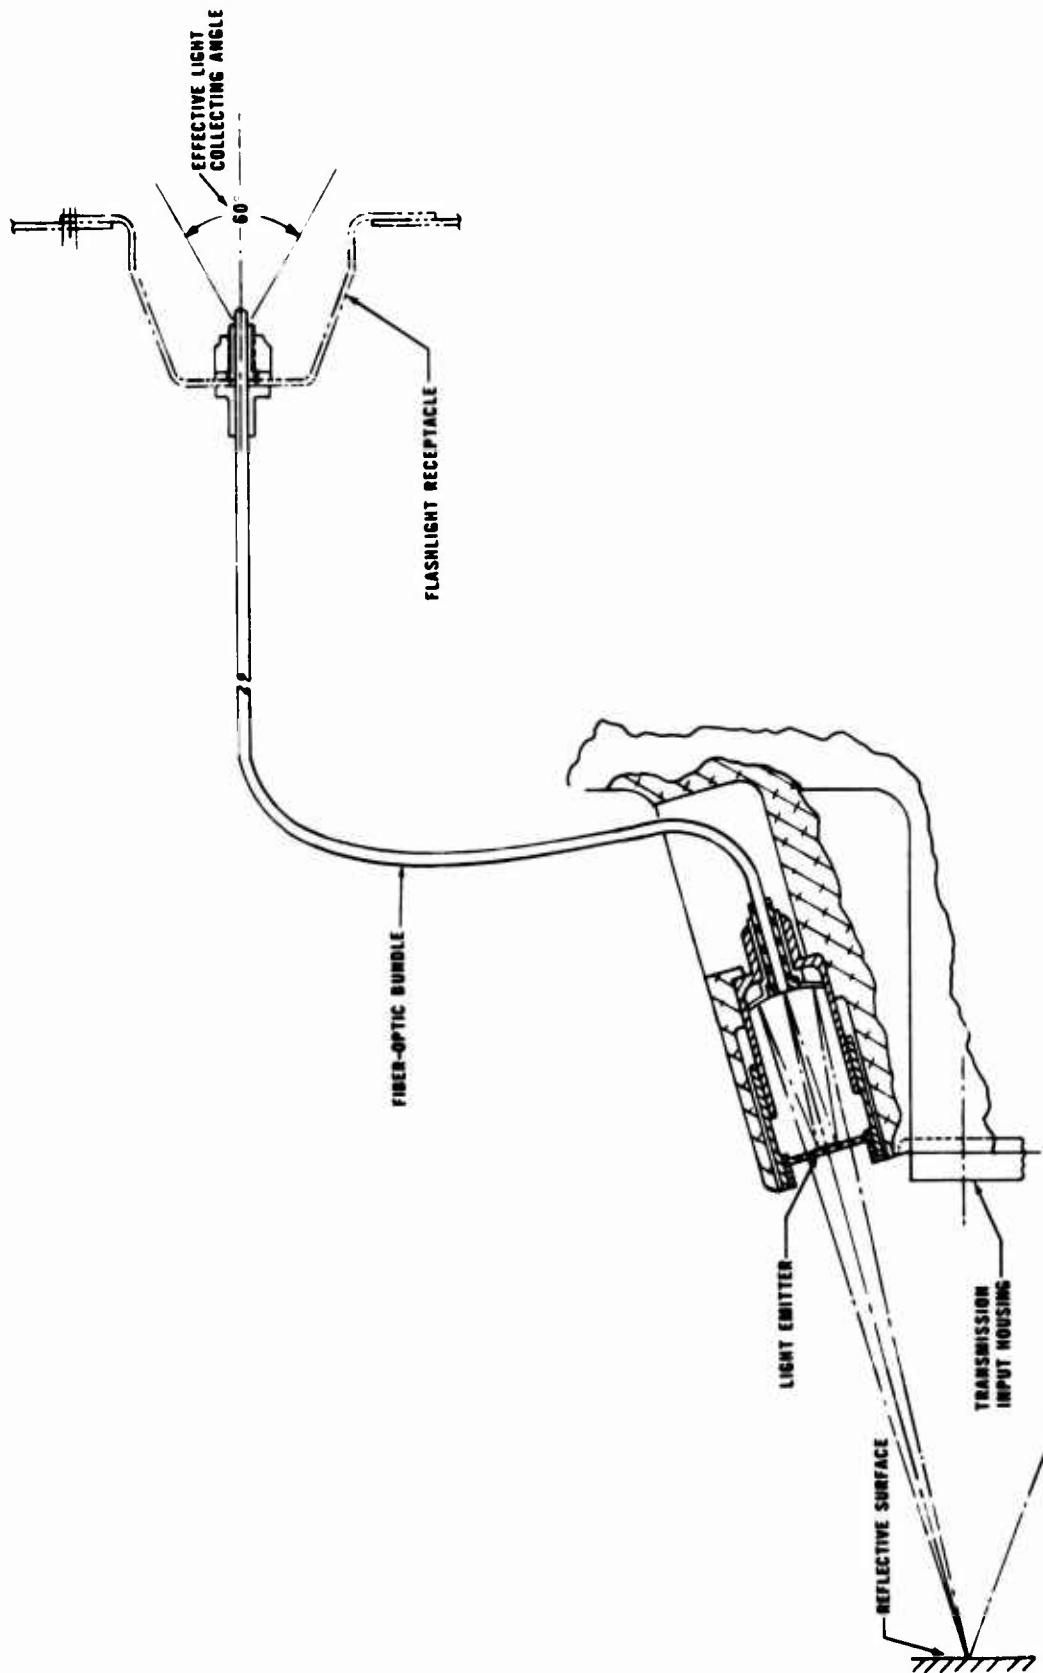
Sectional View of Light Collector and Emitter for Shaft Alignment Indicator.
